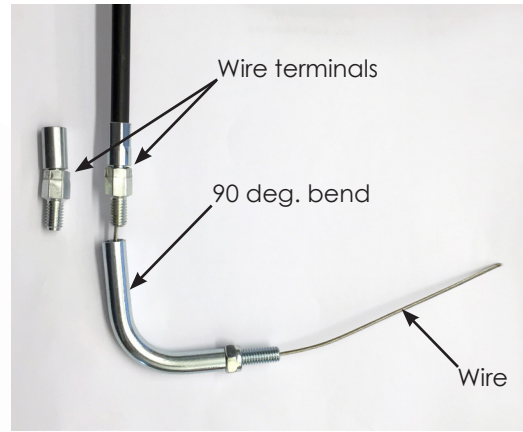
Wire pulled out of wire housing with wire terminals and 90 degree bend
